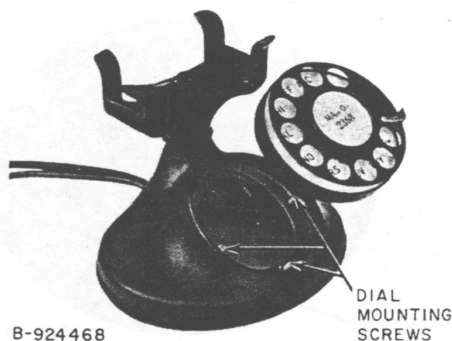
Assembly of Dial on D-Type Handset Mounting
